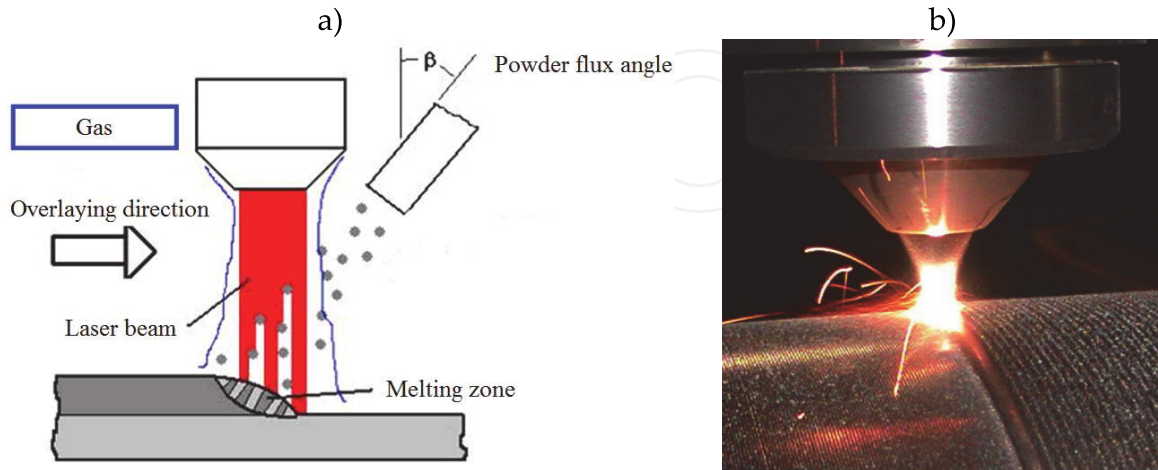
Direct laser deposition technology (DLD): a) the scheme of process, b) the view of process [5]
